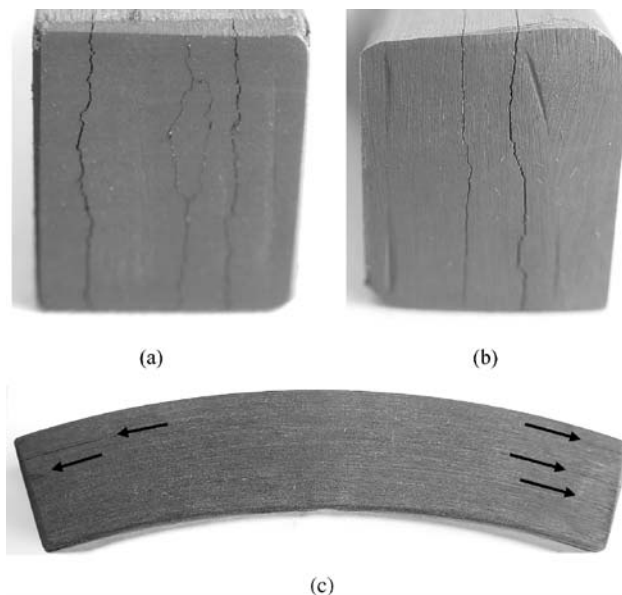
Macroscopic fracture aspect of CFR-E rings with different test geometry after small-scale SBS-test (a) standard geometry cross-section view, (b) round edged cross-section view, (c) round edged top view (*Maeslant-test*)
